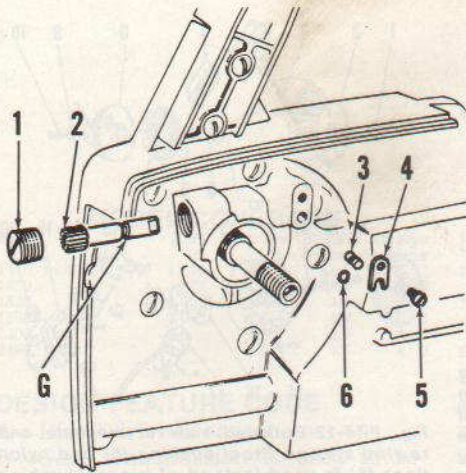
The oiler pump (2) is rotated by a worm gear on crankshaft.
